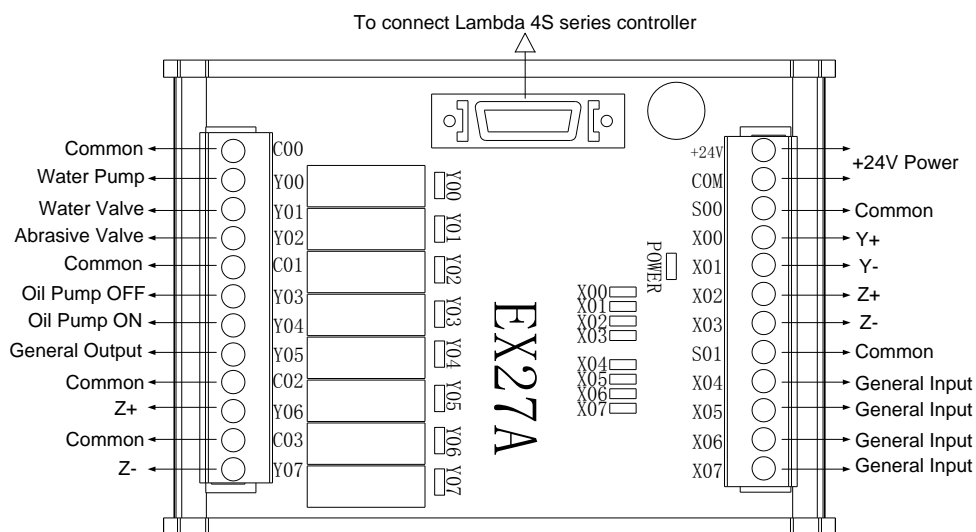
Wiring of EX27A3 in four axes waterjet cutting
